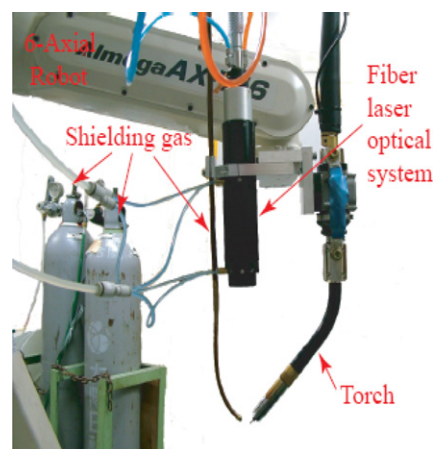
Fiber laser-GMAW hybrid welding system.
